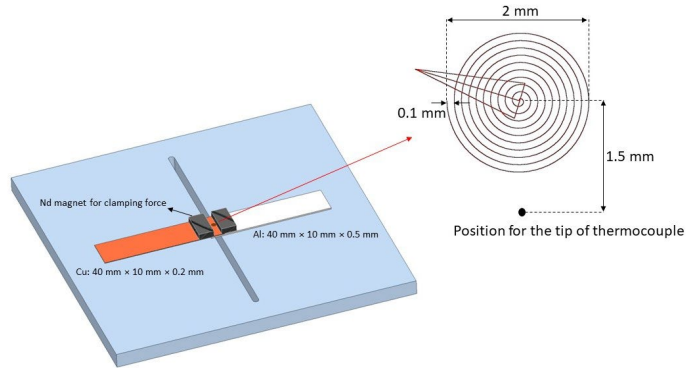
Materials dimensions, welding configuration, and beam trajectory.
